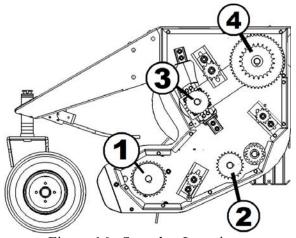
Sprocket Locations Key 1 - Cyl. Driven Key 2 - Cyl. Drive Key 3 - Auger Driven Key 4 - Auger Drive
